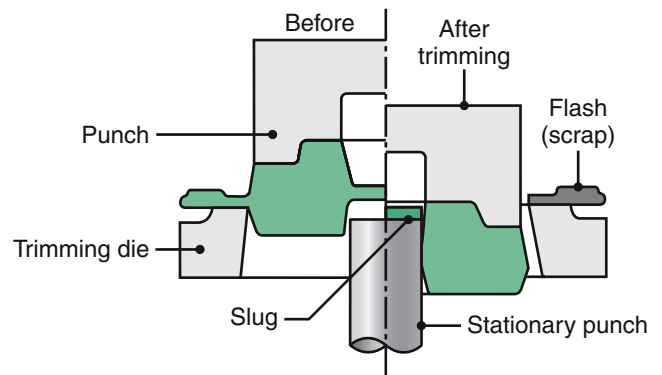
Trimming flash from a forged part. Note that the thin material at the center is removed by punching.
